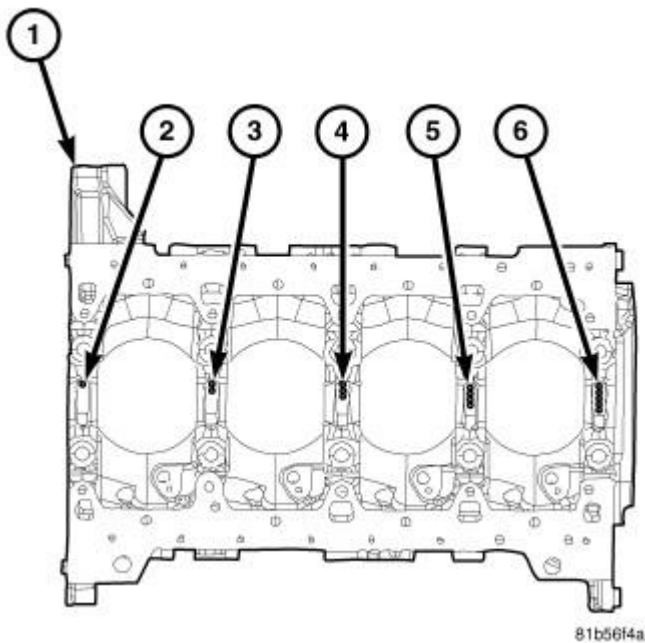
CRANKSHAFT CAP LOCATION MARKS
